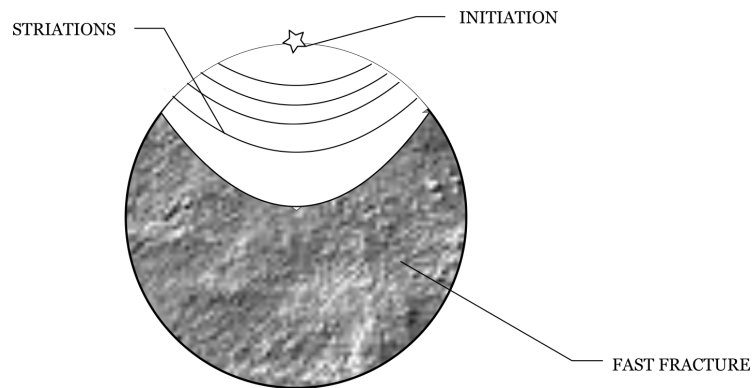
Schematic of typical fatigue fracture surface, showing striations and rapid fracture
